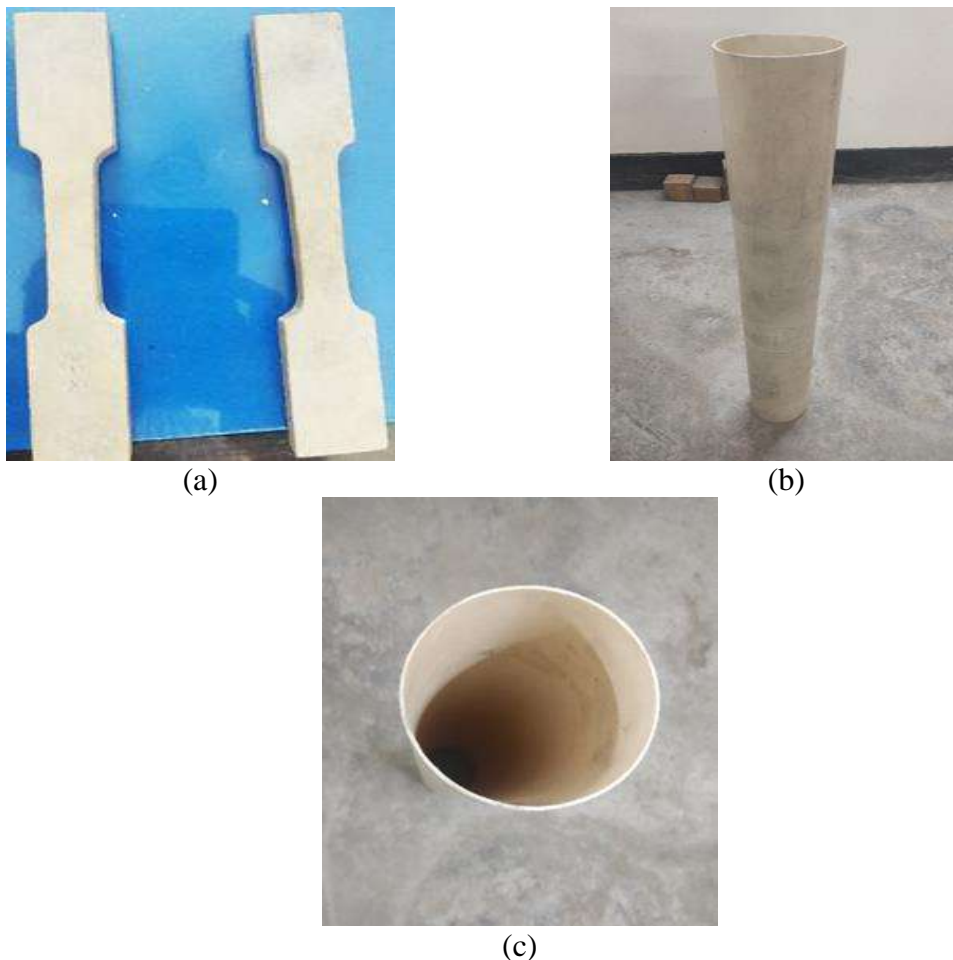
(a) Patterns used to create mould cavity for tensile test (b-c) Pattern used to create mould cavity for making cylindrical shape workpiece.
